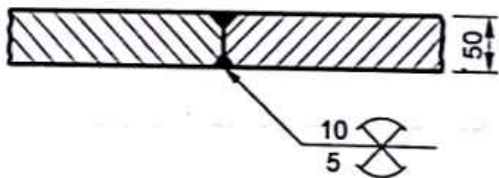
Partially penetrated butt weld asymmetrical in from
